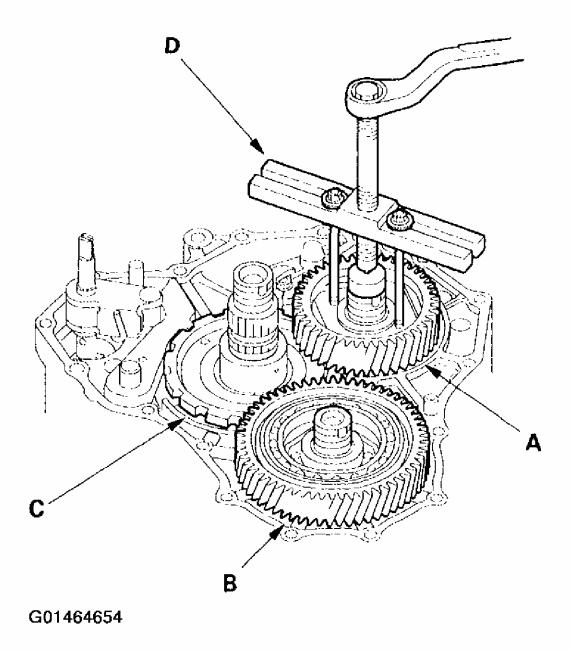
Removing The Mainshaft 3rd Gear, Secondary Shaft Idler Gear & Park Gear
